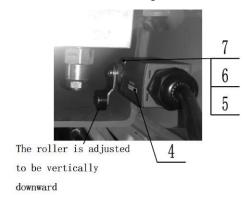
Main arm back end travel switch assembly 4. Travel switch 5. Screw 6. Nut 7. Washer
